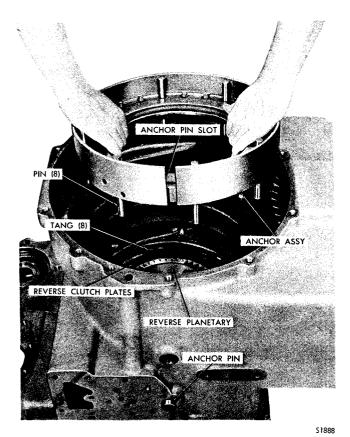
Installing reverse-and-forward clutch anchor assembly
